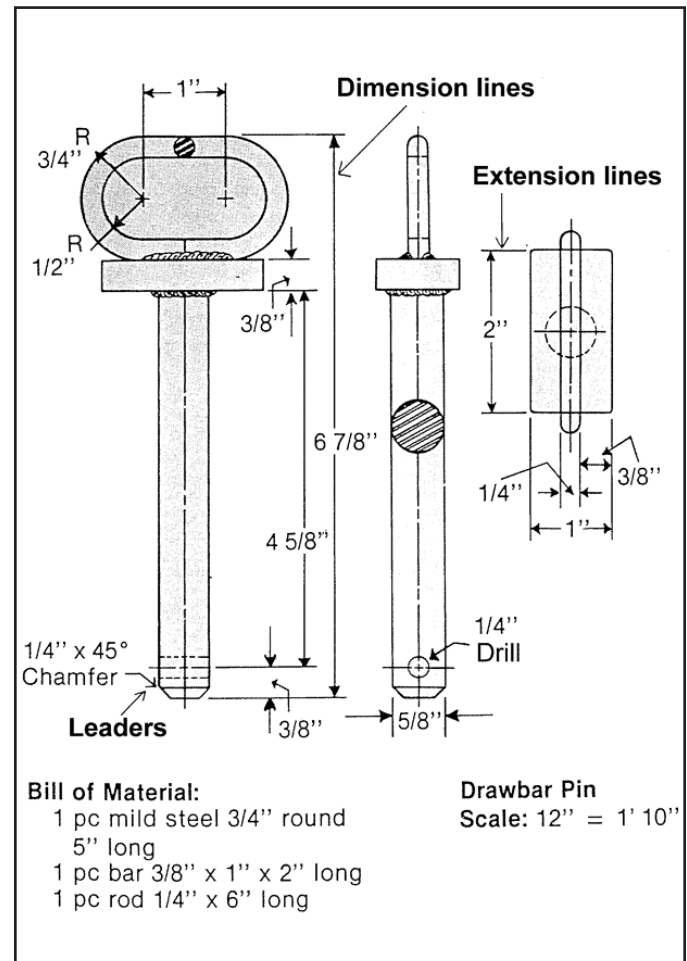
Example of Dimensions in a Working Drawing of a Drawbar Pin
